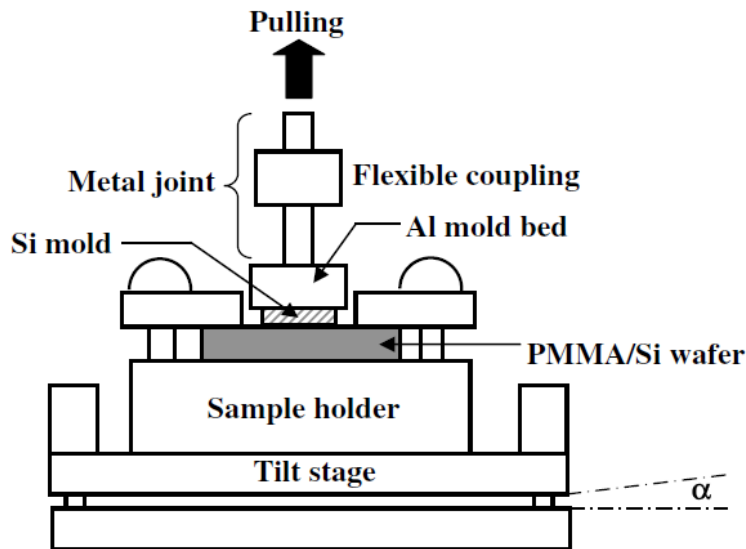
Schematic view of the tool for demolding force measurement in the hot embossing process [47].
